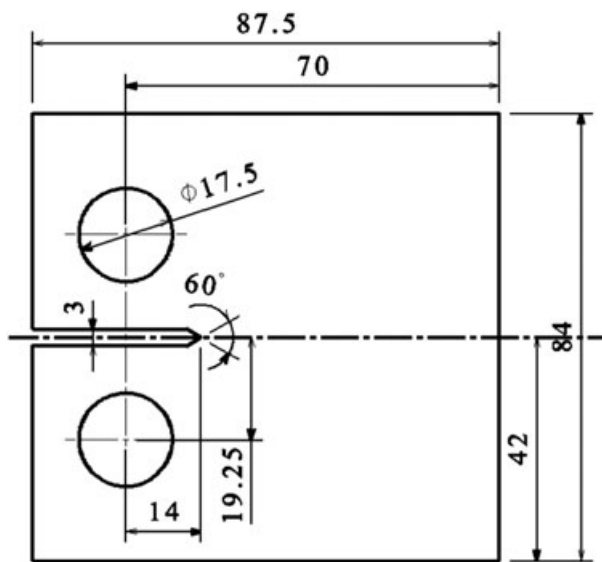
Compact Tension (C(T)) specimen used for fracture toughness and fatigue crack growth rate tests. Dimensions:  $W = 70$  for all thickness values reported in this paper. Thickness values refer to the finishing thickness (after surface machining).  $B = 5$  mm for crack growth rate test in WAAM® alloy;  $B = 6$  mm for crack growth rate test in WAAM®-wrought interface specimens;  $B = 19$  mm for fracture toughness tests of all three different WAAM® deposition strategies (unit: mm).
